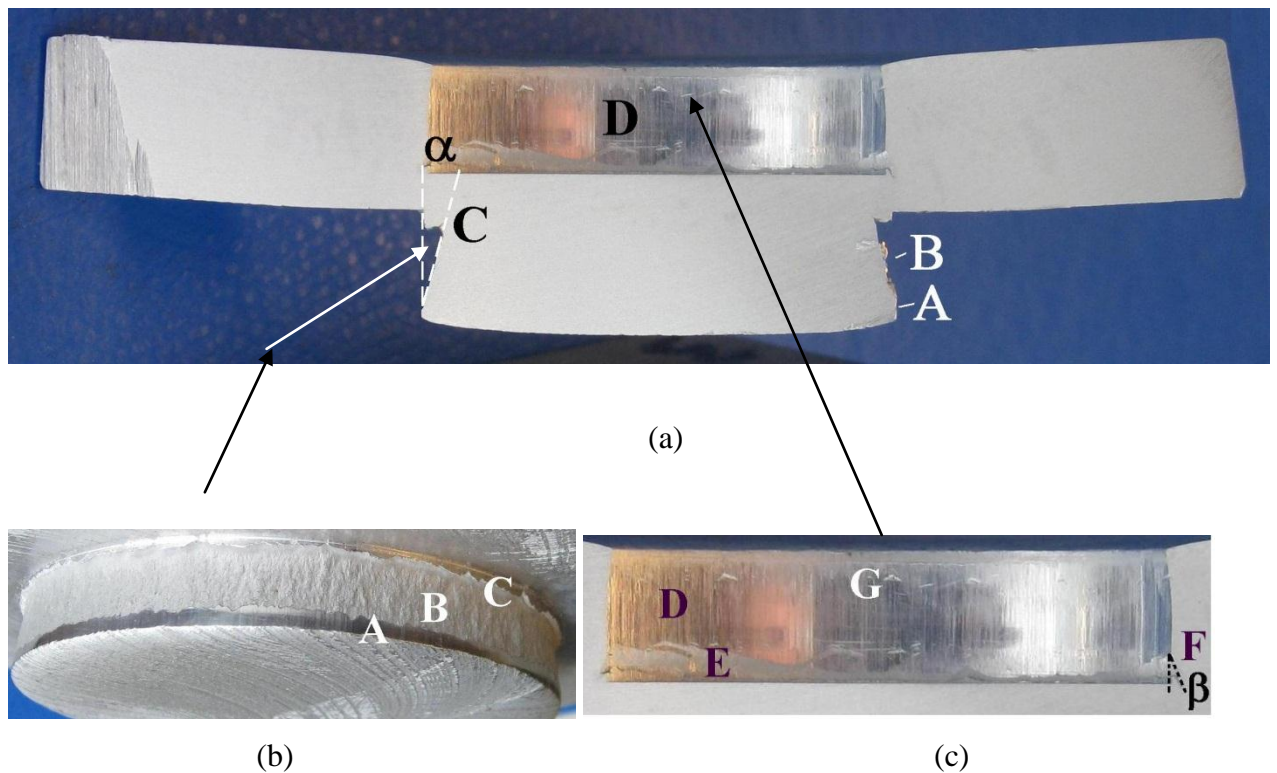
Photographs of partially sheared thick specimen; (a) Section through specimen, (a) Close up view of sheared surface of blank and (c) Close up view of sheared surface of slug.
